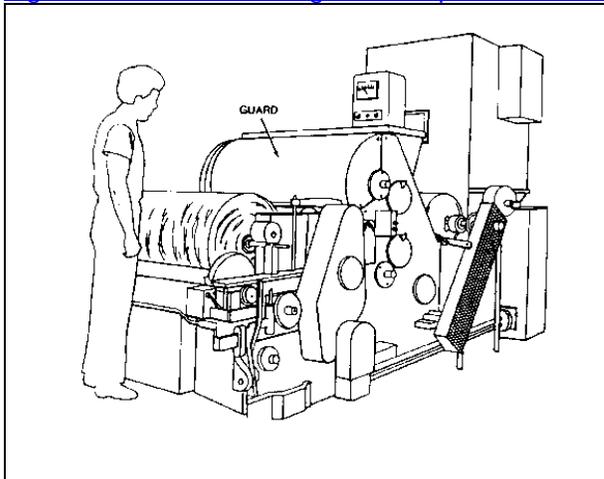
(#) shows an interlocked barrier guard mounted on an automatic bread bagging machine. When the guard is removed, the machine will not function.
